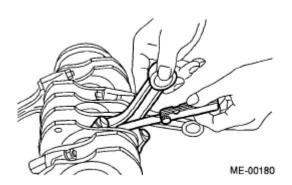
Checking Connecting Rod Side Clearance Courtesy of SUBARU OF AMERICA, INC.
